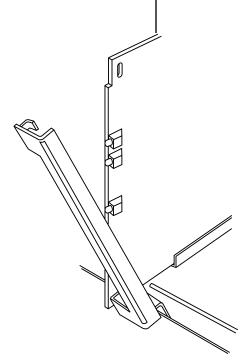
Seating the Lower End of the Faceplate in the Groove on the Bottom Front of the Rack.
